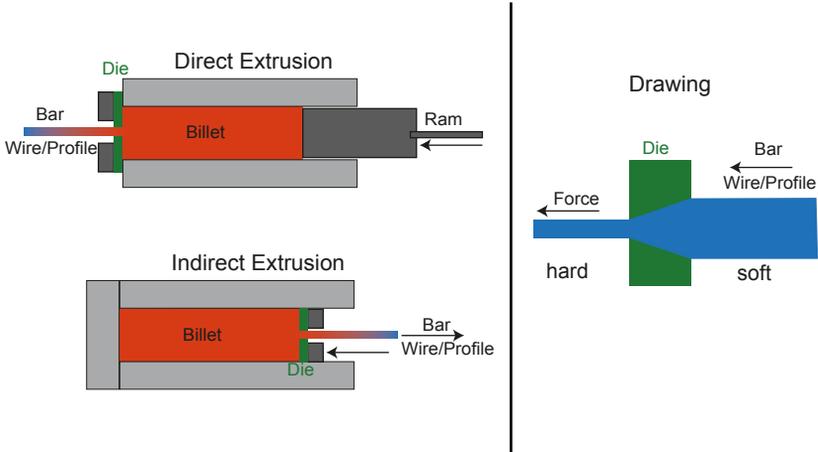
Extrusion and Drawing of Bars/Wires/Profiles
